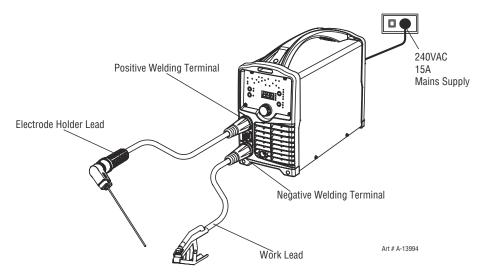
Setup For STICK (MMAW) Welding
